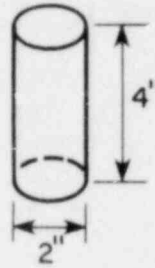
CONSTRUCTION OF TEST SPECIMENS
